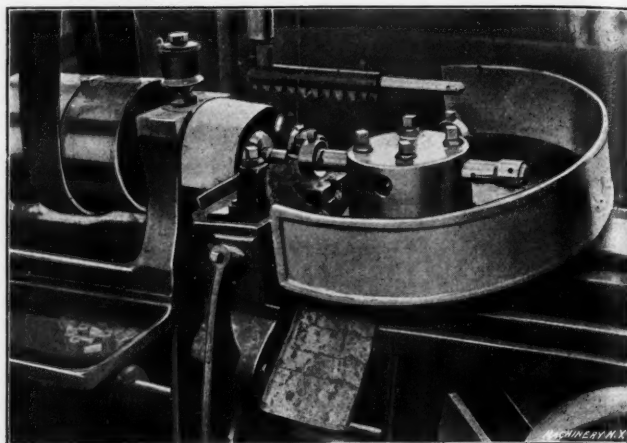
Automatic Machine in which Bearings are drilled and cut off
